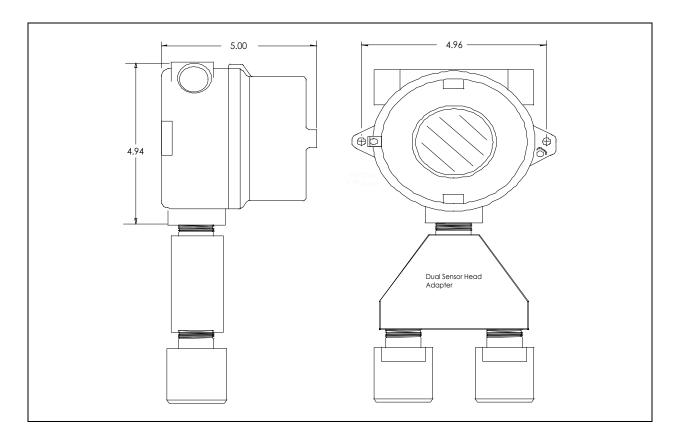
AMC-DTR Explosion-Proof Housing with Dual Sensor Head Adaptor
